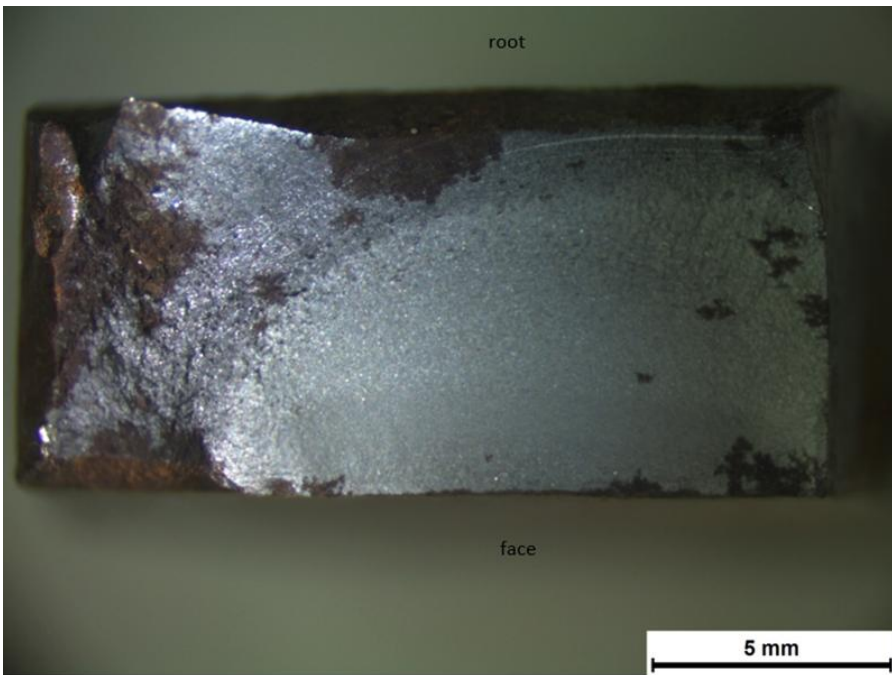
Corroded fracture surface of S355J2+N material
